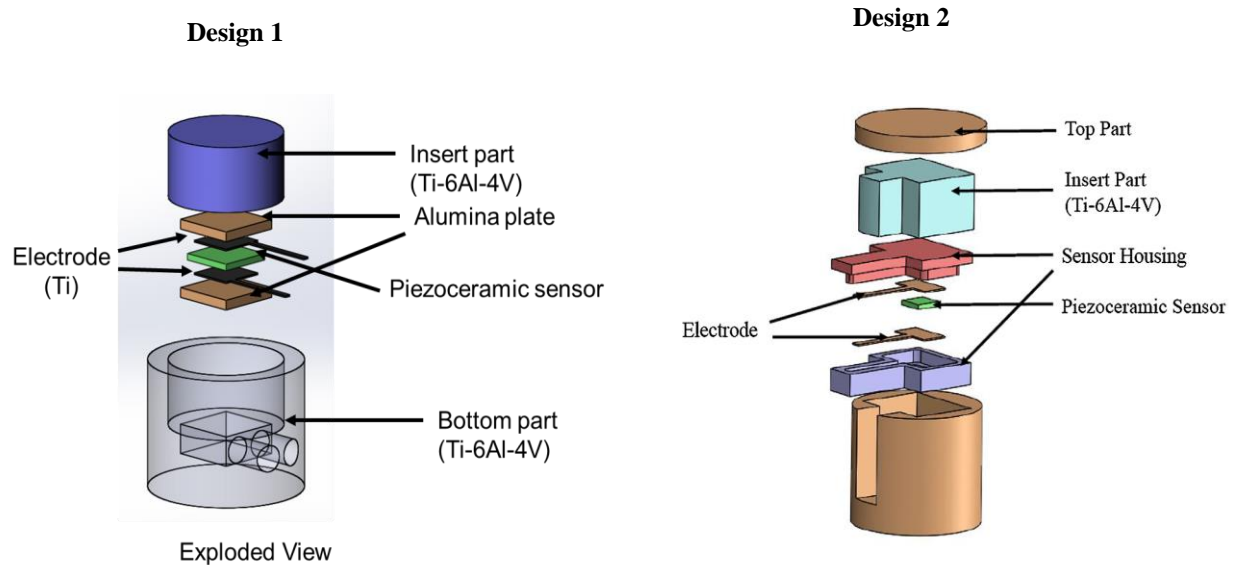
Exploded views of the two different designs used for the “smart cylinders”. Design 1 (left) uses two simple ceramic plates to isolate the sensor from the metallic body, where design 2 (right) contains a ceramic sensor housing for protection of sensor in harsh fabrication environments [68].
